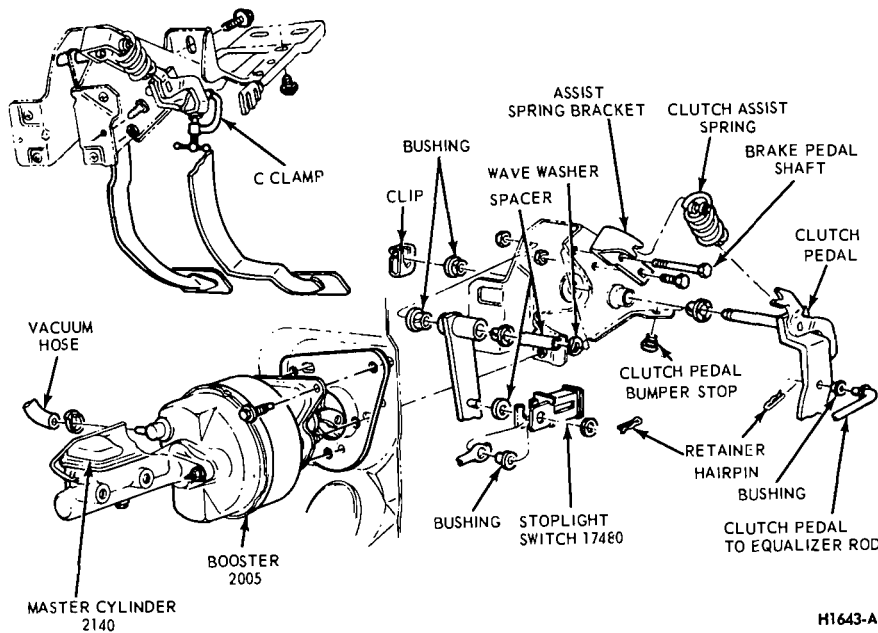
Master Cylinder Installation—Power Brake—Mustang and Cougar
